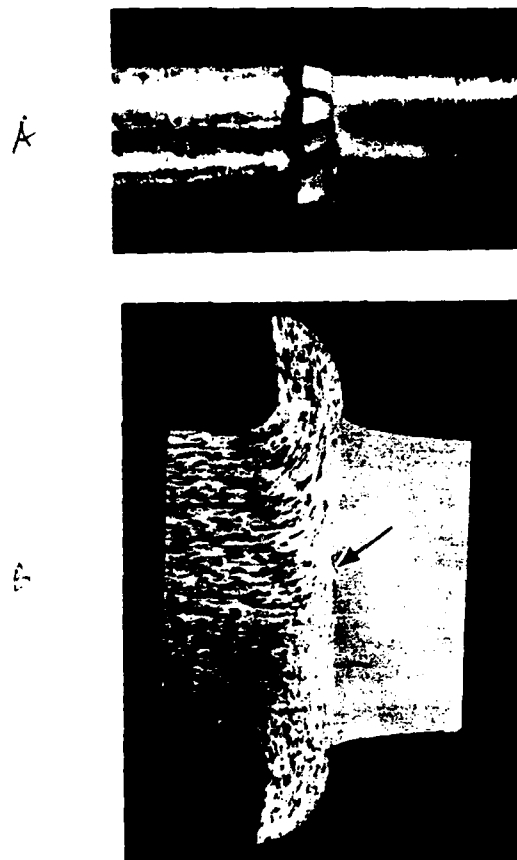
Inertia-friction weld between Al-9Fe-4Ce (left side) and 2024-T351(right side) (A) as-welded specimen, (B) axial section, arrow indicates weld interface.
